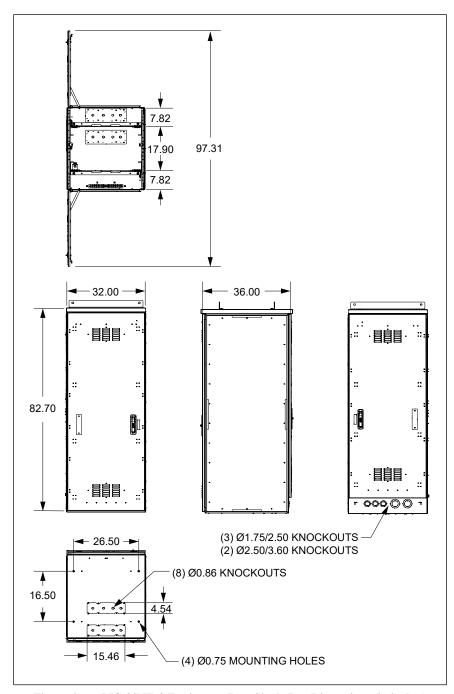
MC-3/ME-3 Equipment Bay, Single Bay Dimensions (in inches)
